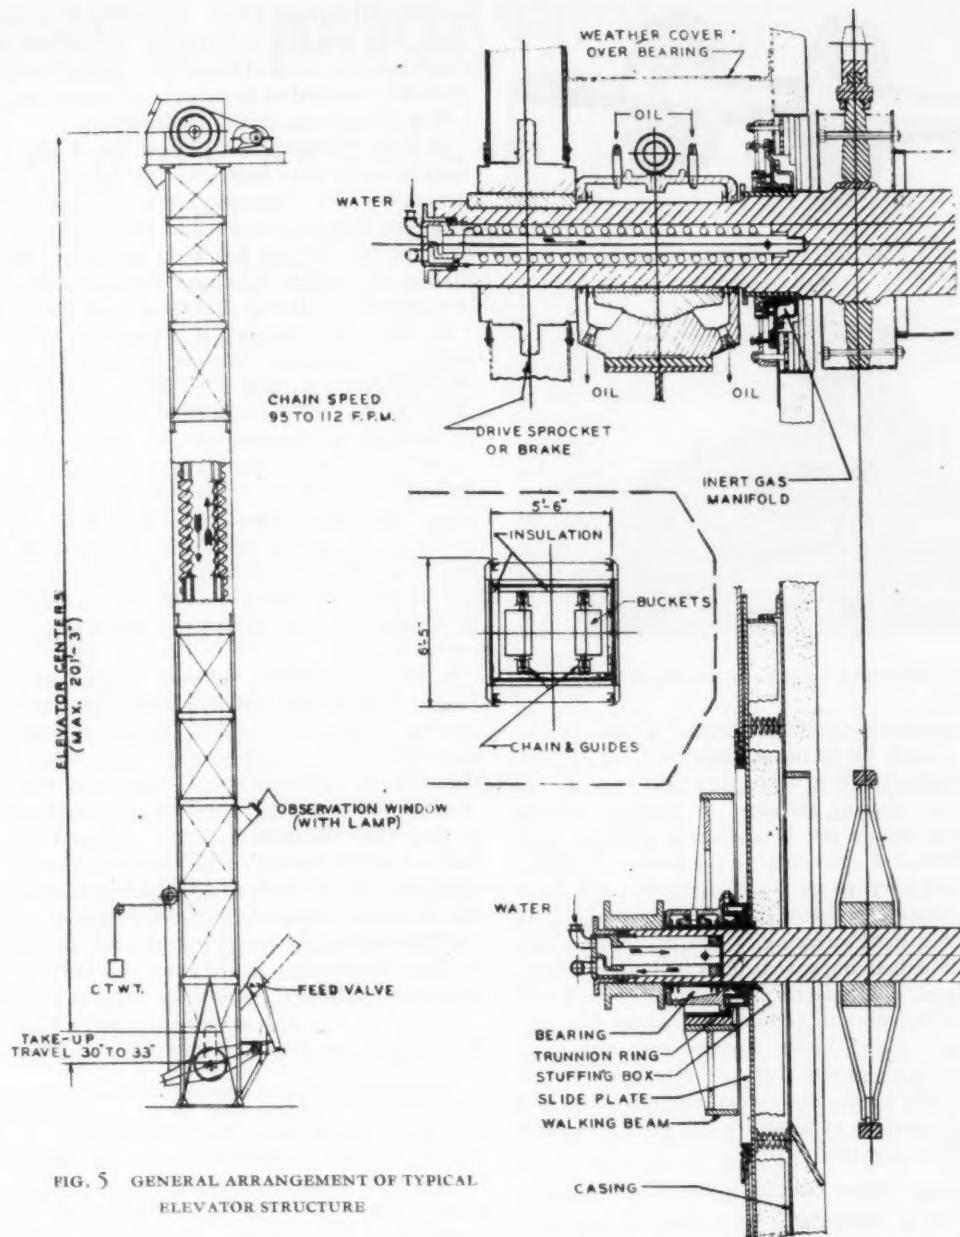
GENERAL ARRANGEMENT OF TYPICAL ELEVATOR STRUCTURE
